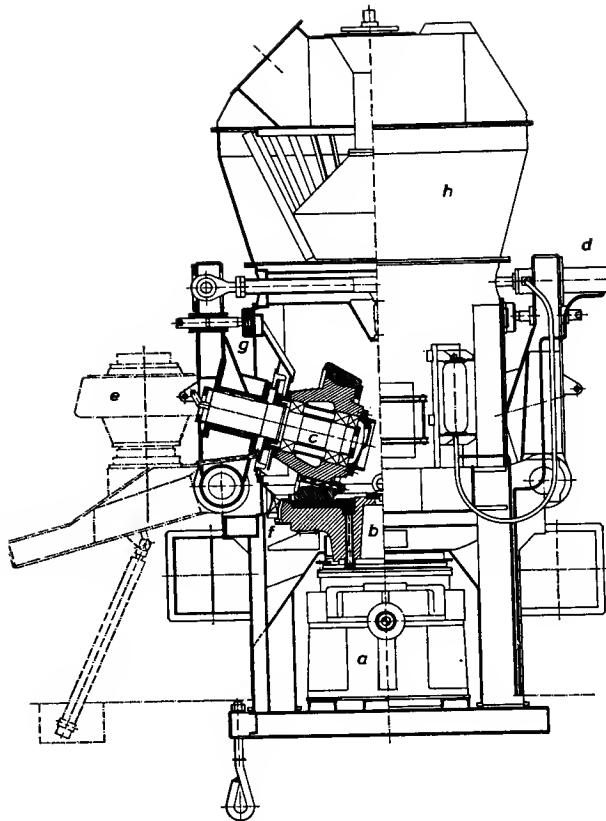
Loesche mill type LM 17 with hydropneumatic spring mechanism: (a) mill gear box, (b) grinding table, (c) grinding rollers, (d) spring mechanism, (e) roller in swung-out position, (f) Louvre ring, (g) buffer stops, (h) classifier. (From Ref. 92.)
